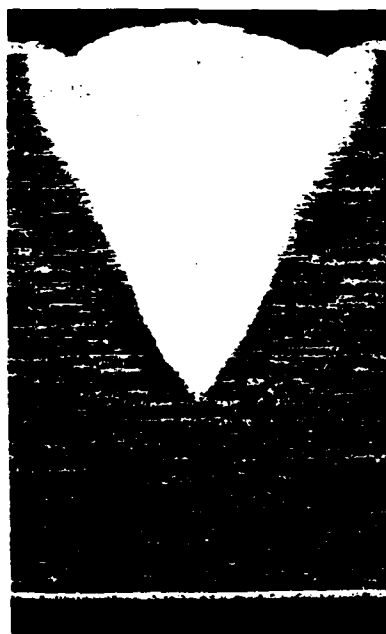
Laser welded aluminum bead on plate showing effect of shielding gas flow rate on weld penetration and bead shape. Mag. 6X.
